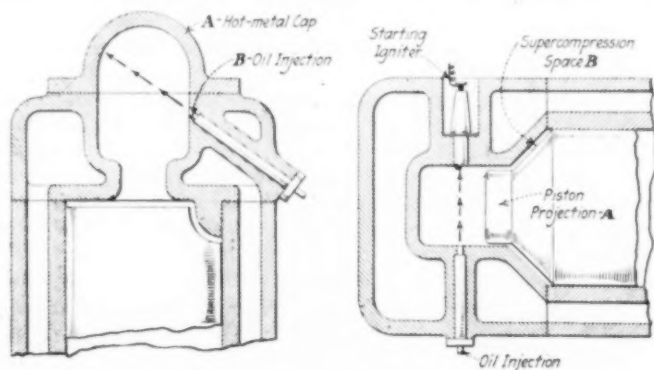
HORNSBY TYPE OF COMBUSTION CHAMBER
